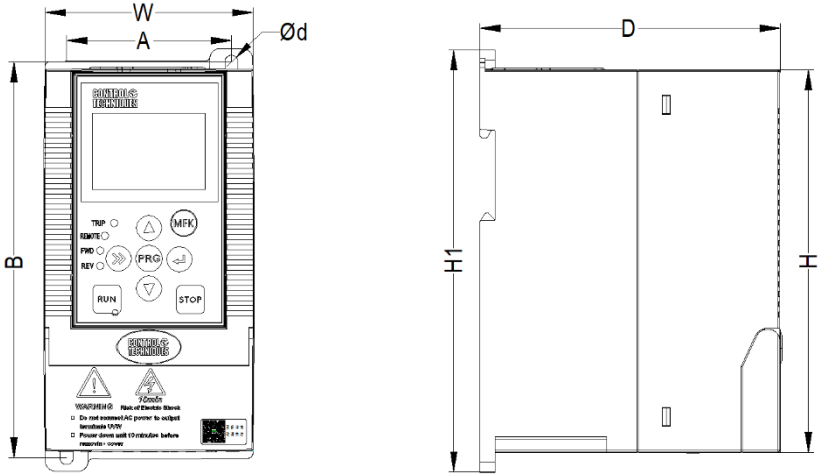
Product Outline, Mounting Dimension Schematic diagram
